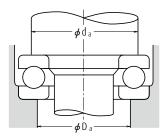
Face Supporting Diameters for Thrust Ball Bearings
